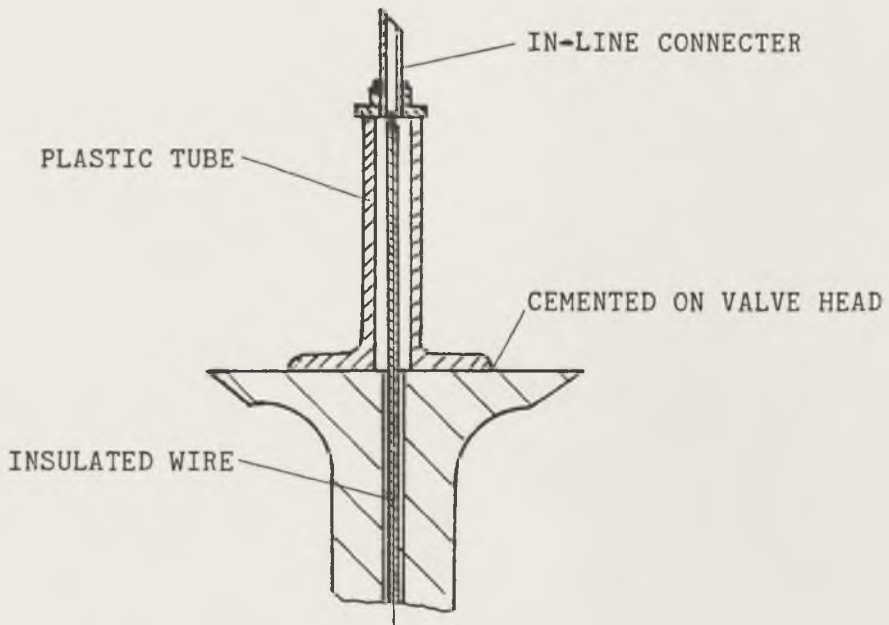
shows the insulated wire for the resistivity circuit. Instead of soldering the wire on a bronze screw wedged behind the mica biscuit (Harrison (1985) Figure (7.4b)), it was welded directly onto the metal piece which is cemented onto the mica biscuit, so that the conductivity between the wire and the metal piece was greatly improved.
